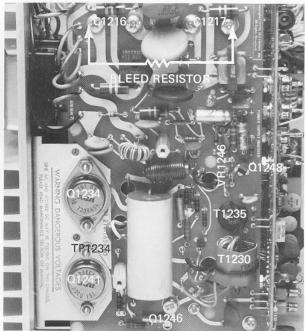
Partial view of the inverter board showing where to apply bleeder resistor to discharge C1216 and C1217.
